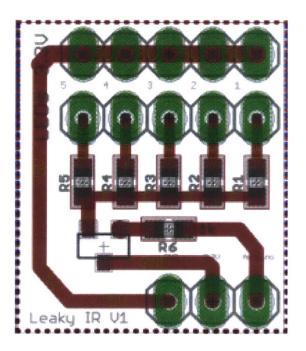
pcb design for connecting 9 IR LEDs to SoundLink 35 ear caps
